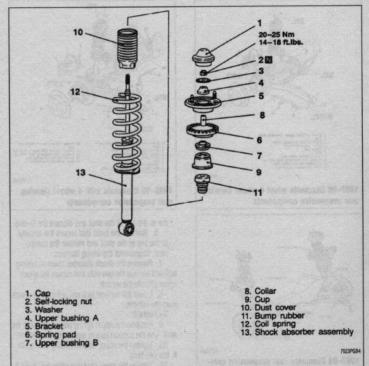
Exploded view of the rear shock absorber assembly—Galant and Mirage
